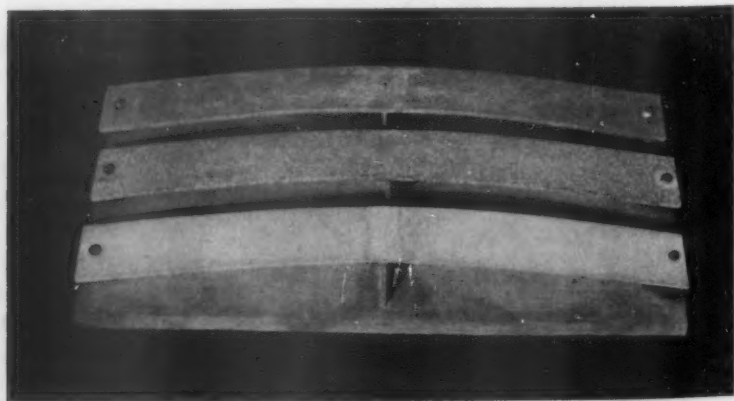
METHOD OF STRESSING CORROSION-FATIGUE SPECIMENS.
